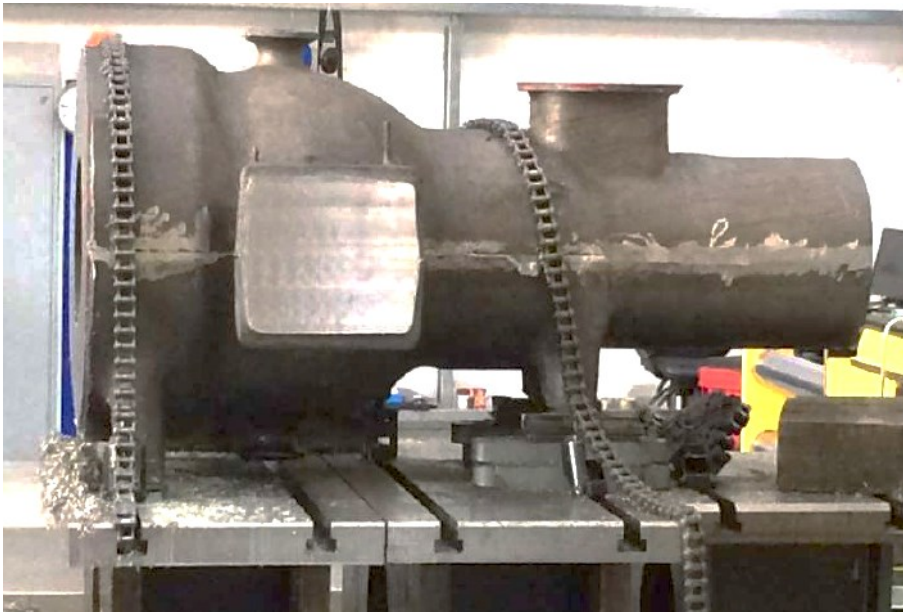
G130 Stop Valve Cast Body (Net weight 2,000kg; thickest section 180mm) manufactured within the EU funded NextGen Power (6)/ MACPLUS (5) collaboration.
